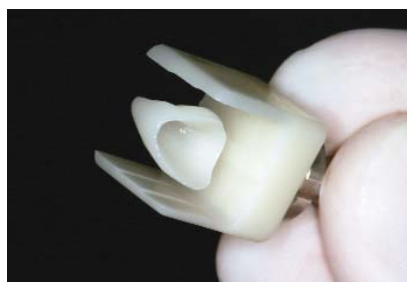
Machined central still attached to the milled block. This view shows the precise smooth margin outline. This is the physical reflection of well-defined preparation margins.
